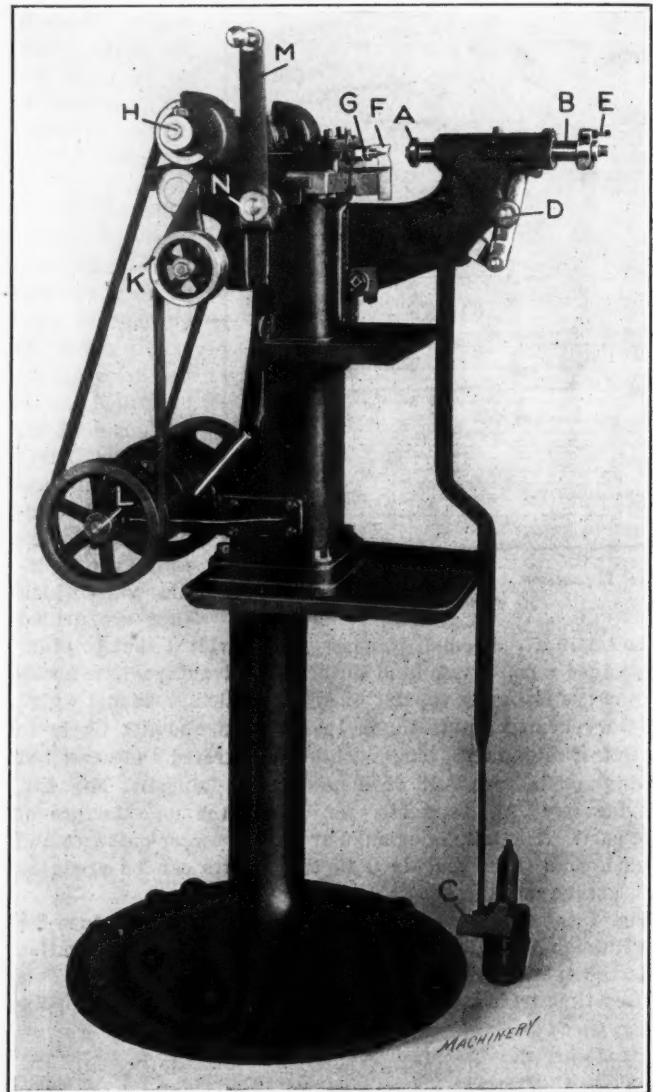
Special Duplex Milling Machine for Wrench Slots in Closing Cap
